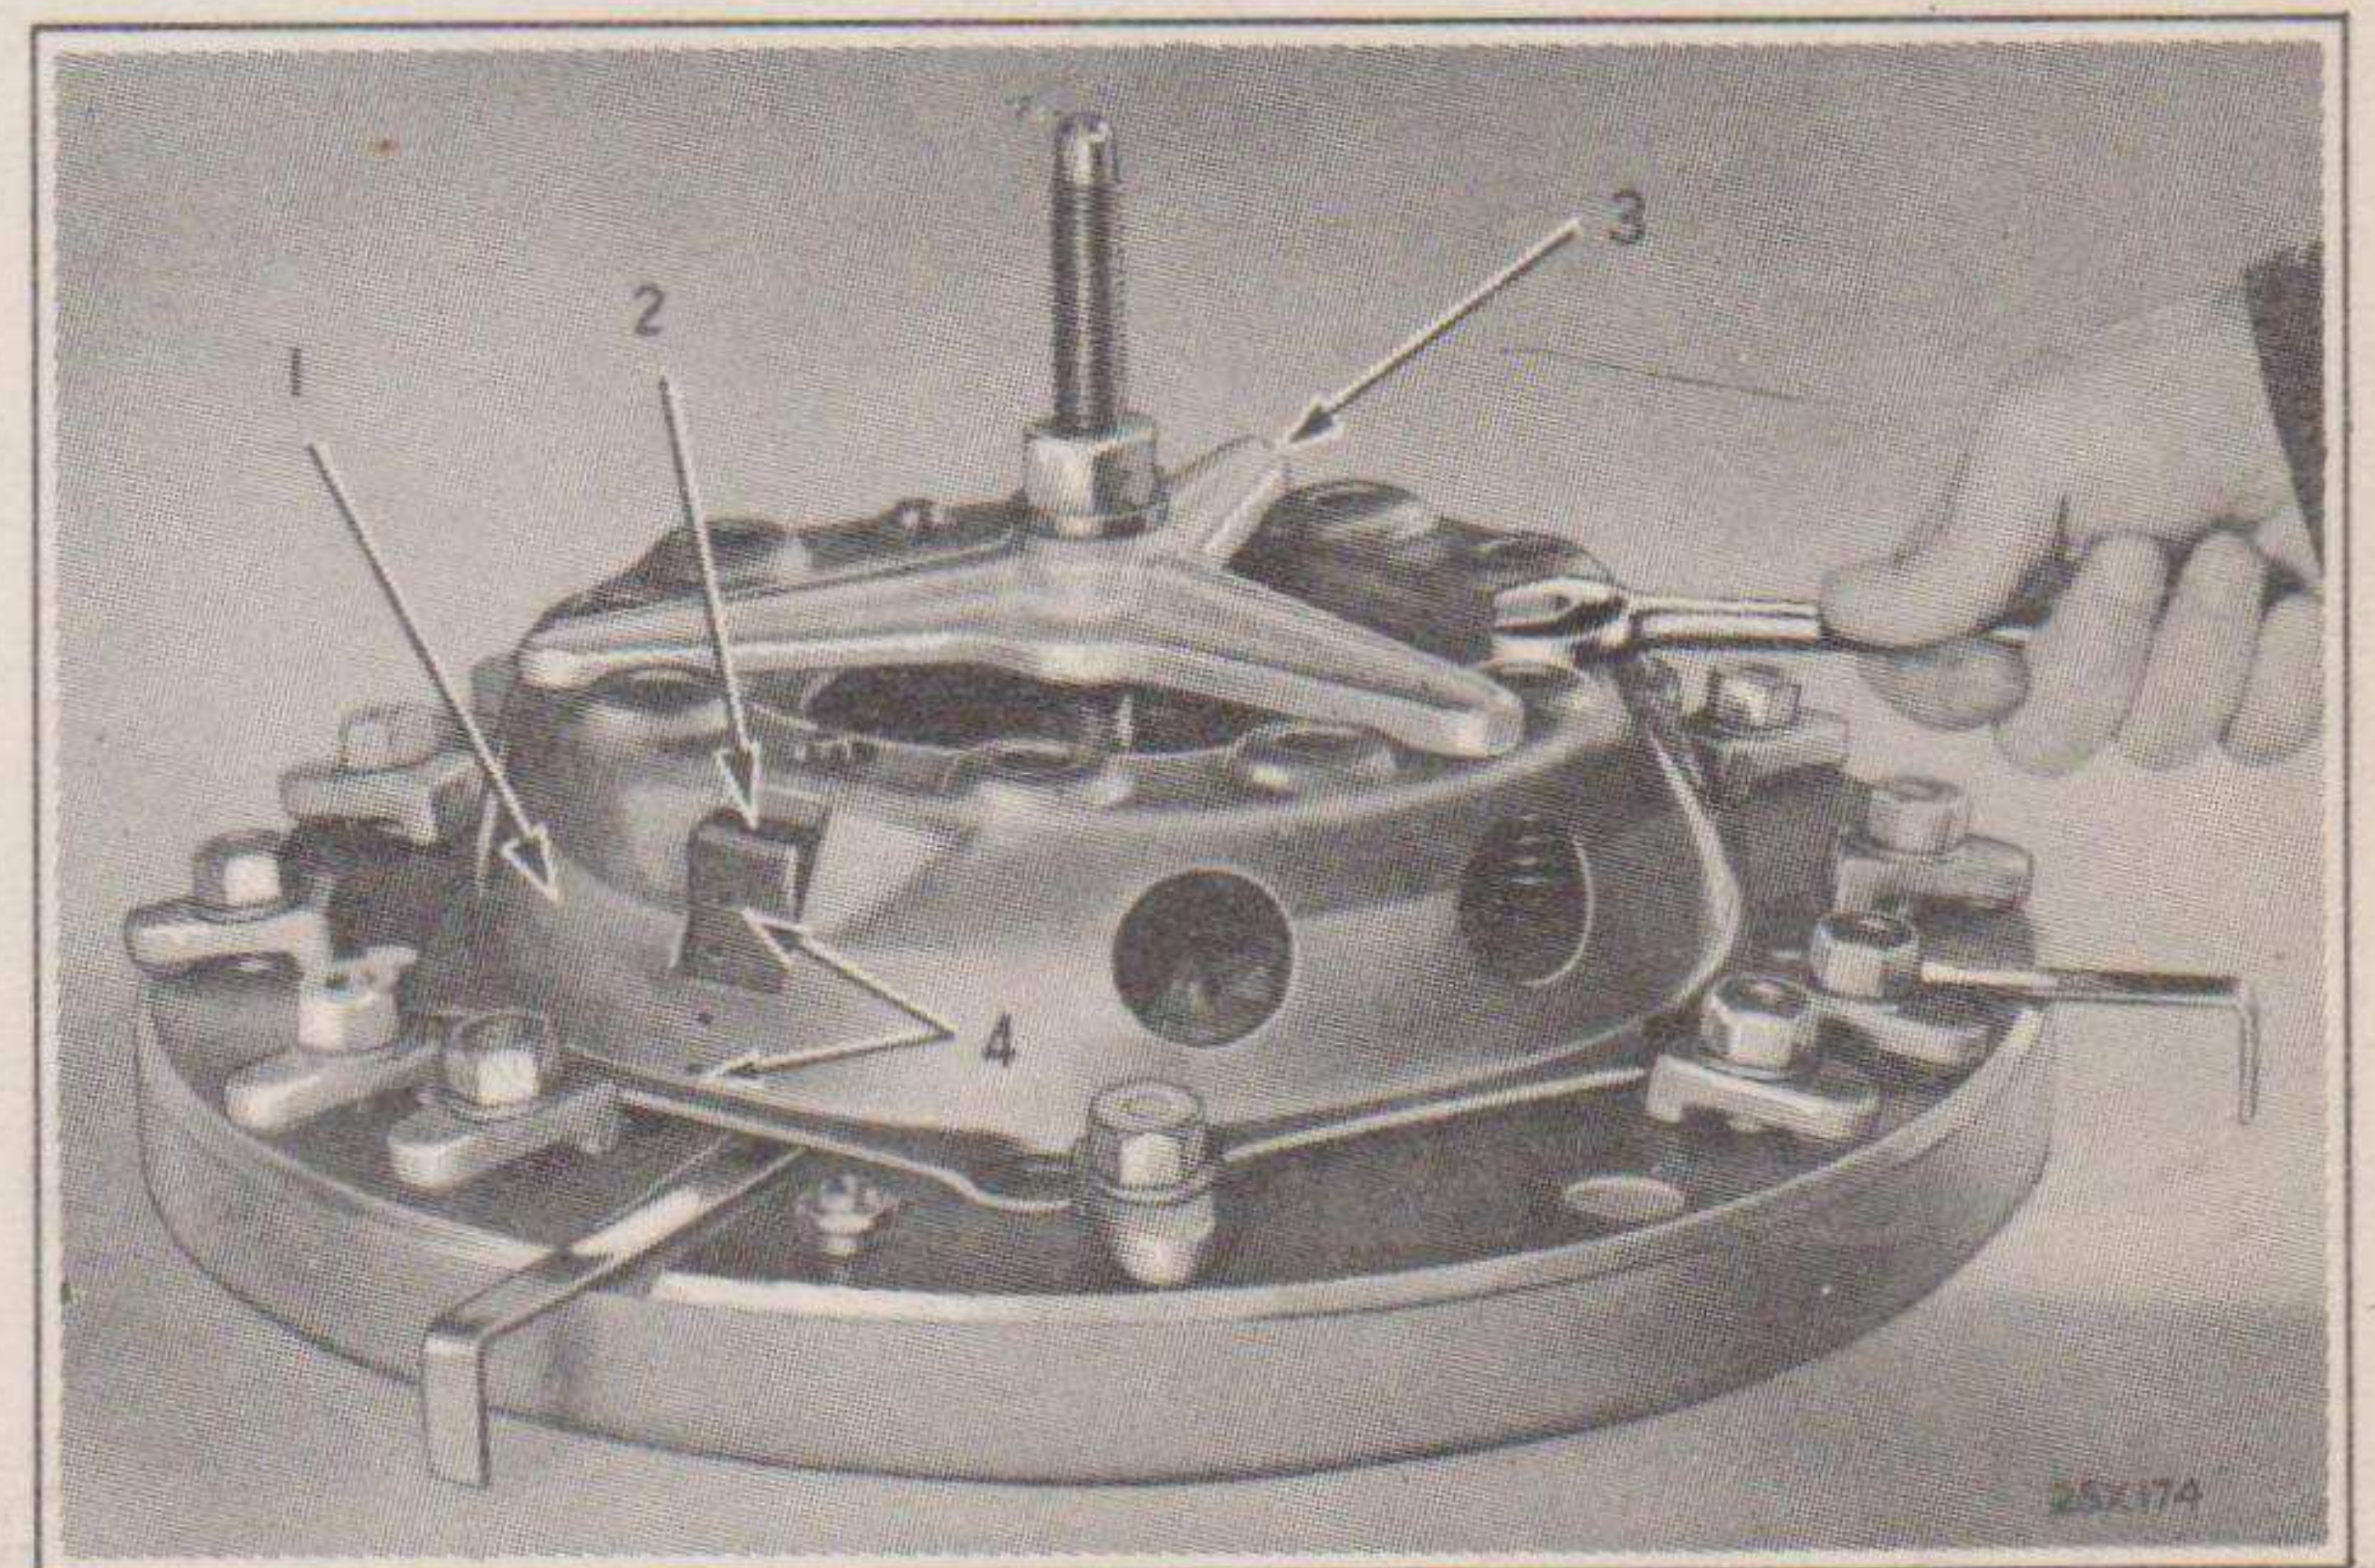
Clutch Cover and Pressure Plate Assembly in Fixture
